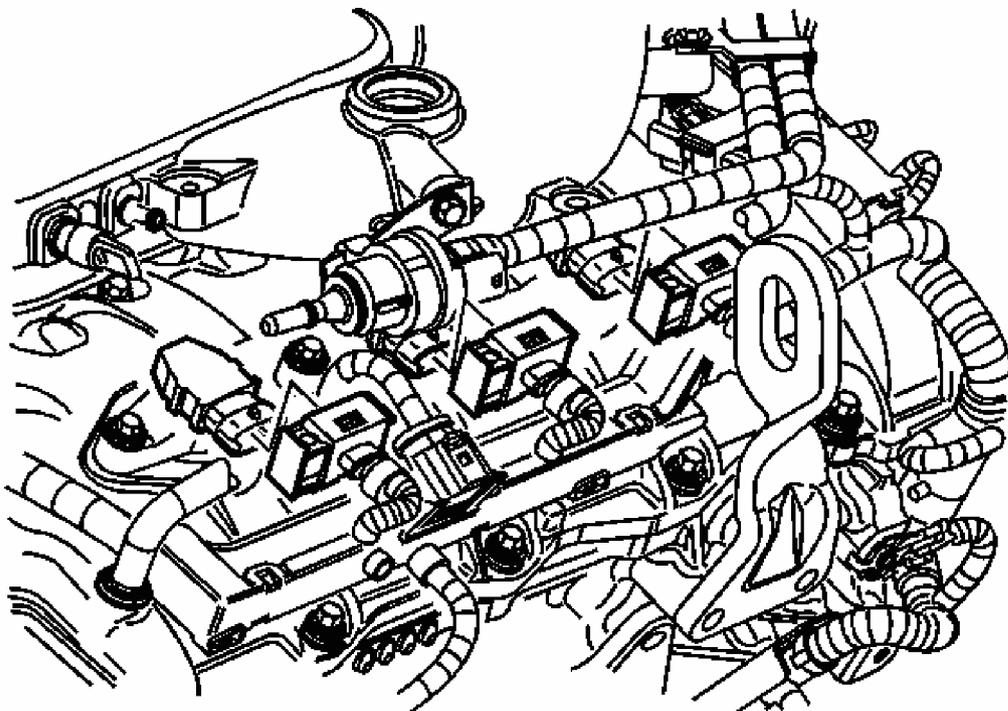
View Of Right Ignition Coils Electrical Connectors
